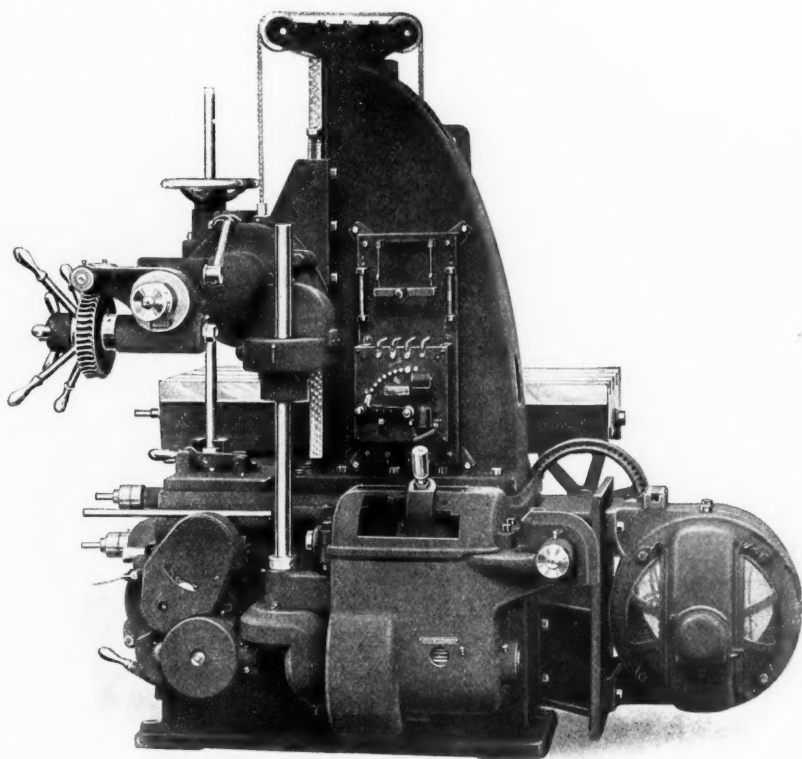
Arrangement of Drive on Fostick Boring Machine, for Use with Constant Speed Motor
